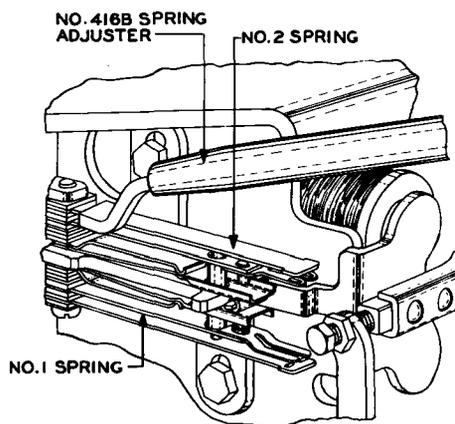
Fig. Z – Method of Adjusting Springs for Straightness and Clearance
